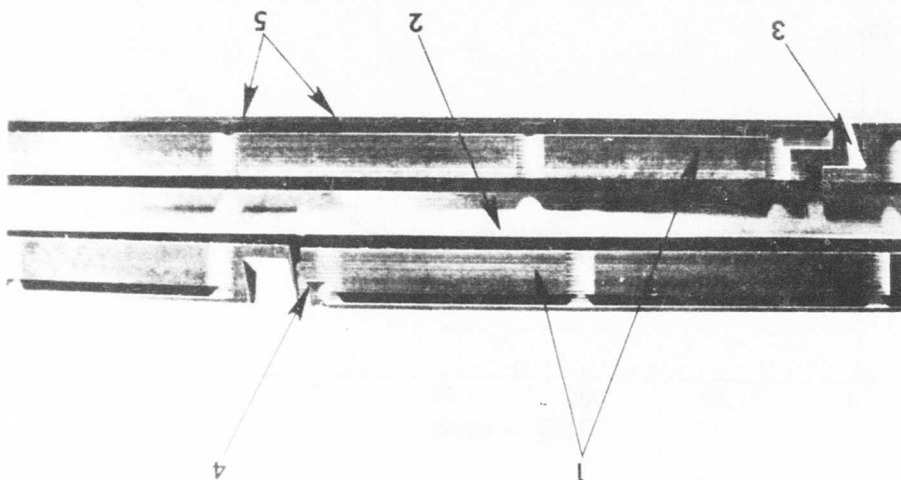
Edge View of Regenerator I.D. Ring Seal, Back-to-Back Segmented Carbon Seal, Showing (1) Carbon Segments, (2) Thrust Plates, (3) Step Joint, (4) Damaged Step Joint, and (5) Sealing Lips, Axial and Radial.
